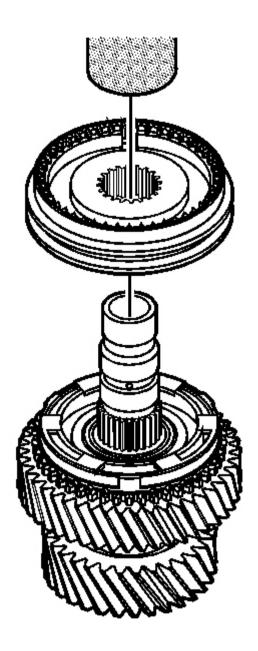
Installing 1st/2nd Gear Synchronizer Courtesy of GENERAL MOTORS CORP.
